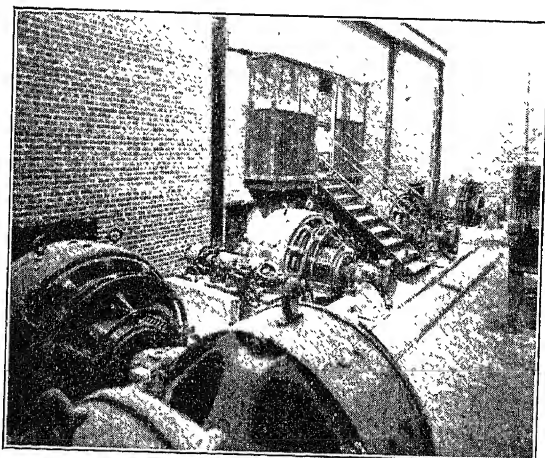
TWO 720-HP., AND TWO 600-HP. D-C. MOTORS DRIVING THE FINISHING STANDS OF A 10-IN. TANDEM HOT STRIP MILL AT LACLEDE STEEL COMPANY
